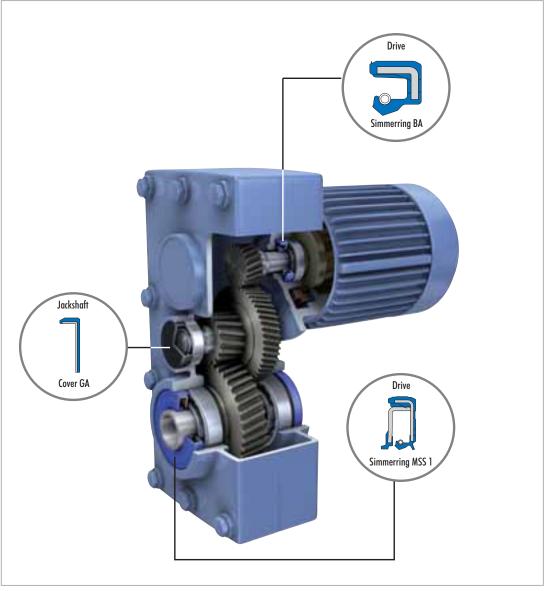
Simmerrings and sealing covers in industrial gearboxes
